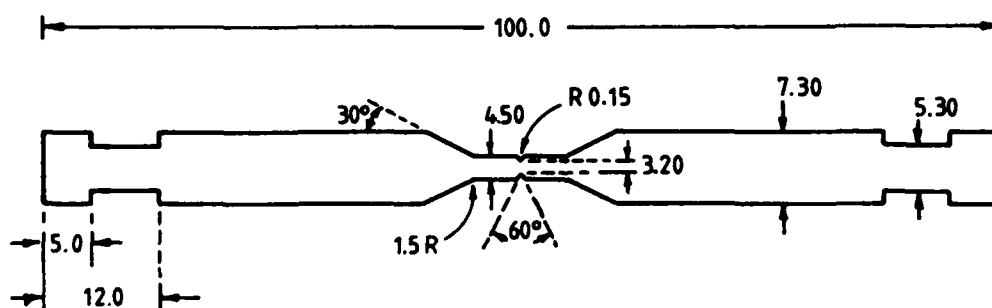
4340 STEEL NOTCHED TENSILE SPECIMEN. DIMENSIONS IN mm.
